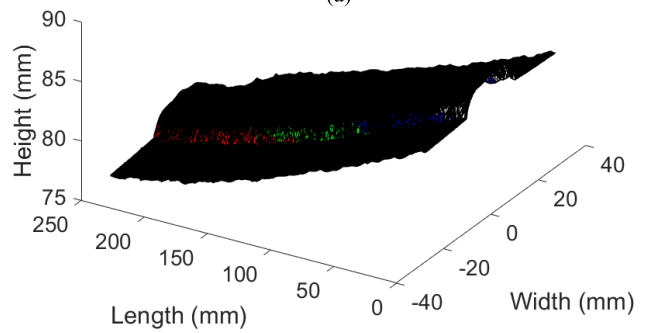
Measuring residual height of removed helical seam weld beads at steel pipe end.
